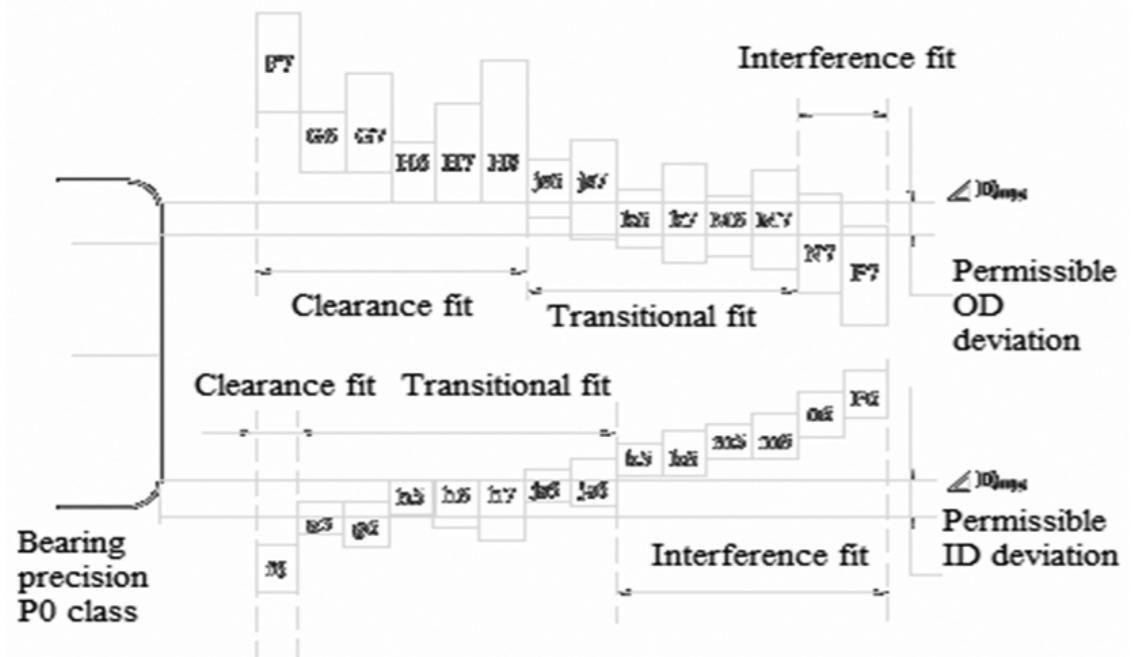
Relations between dimension tolerances of shaft and housing bore and fit (bearings of P0 class precision).
